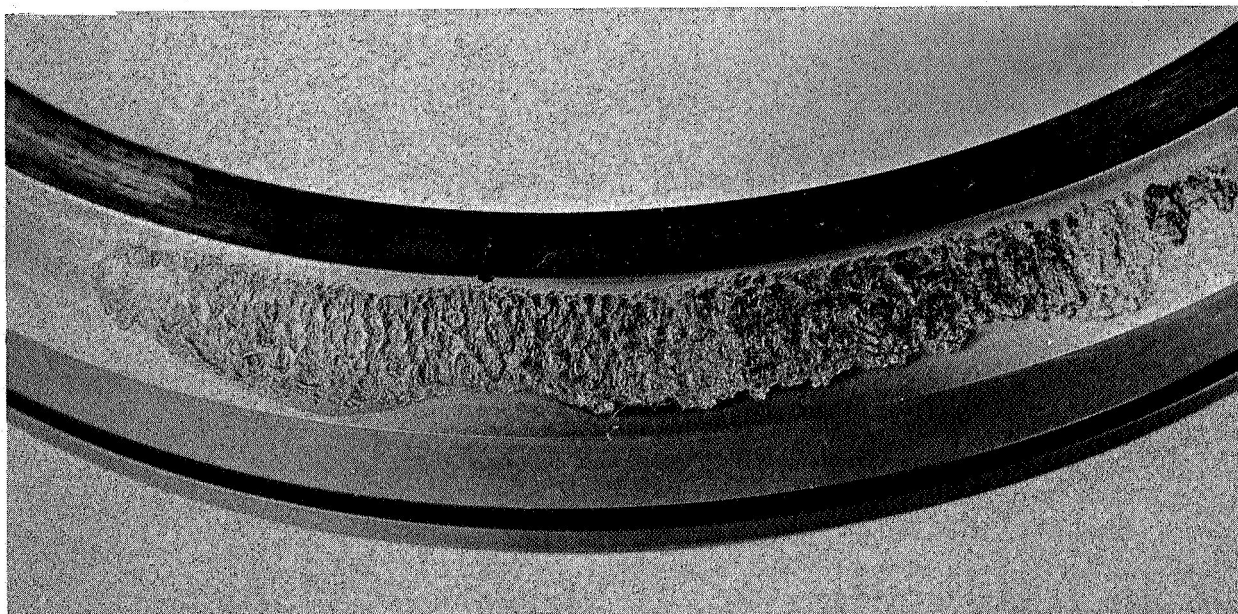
FATIGUE SPALL ON INNER RING - BEARING S/N 33
